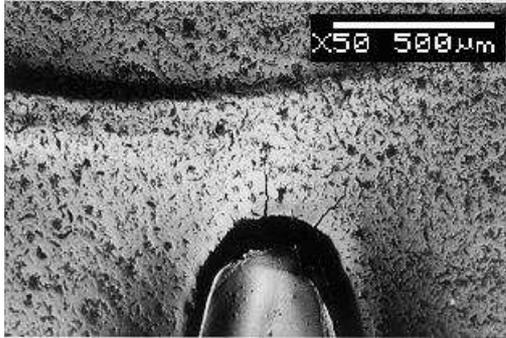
Working surface of the testing die-casting die. Surface crack and pits.
